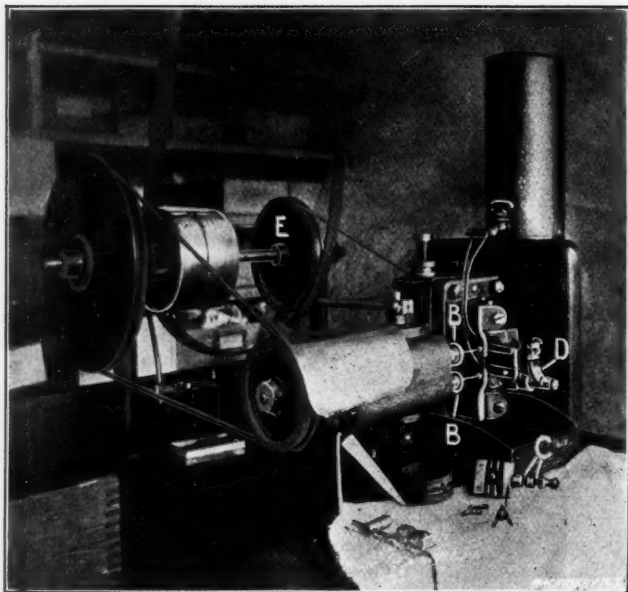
Machine for Milling Oblong Holes in Flexible Shaft Links
